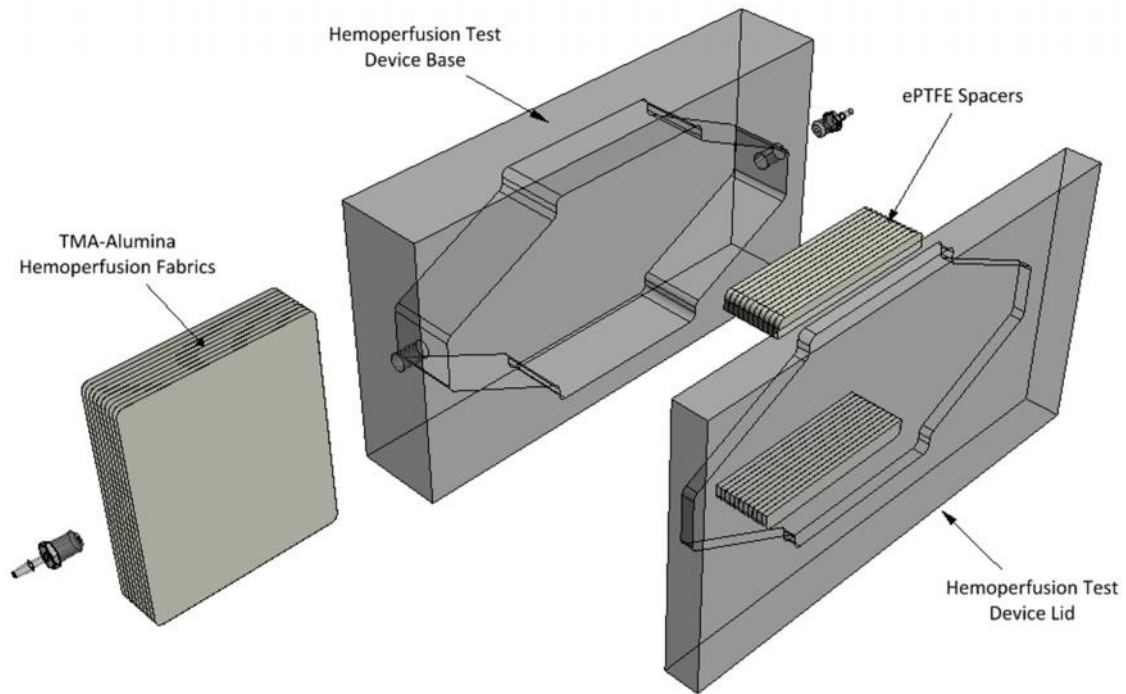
Exploded view of the hemoperfusion test device, showing the disassembled components.
